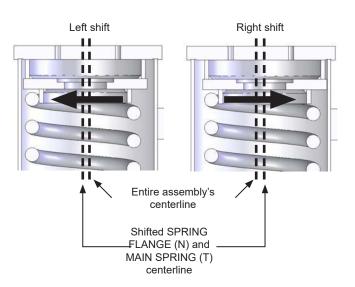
Cross-sectional views showing examples of Main Spring & Spring Flange shifting (certain components hidden for clarity)
